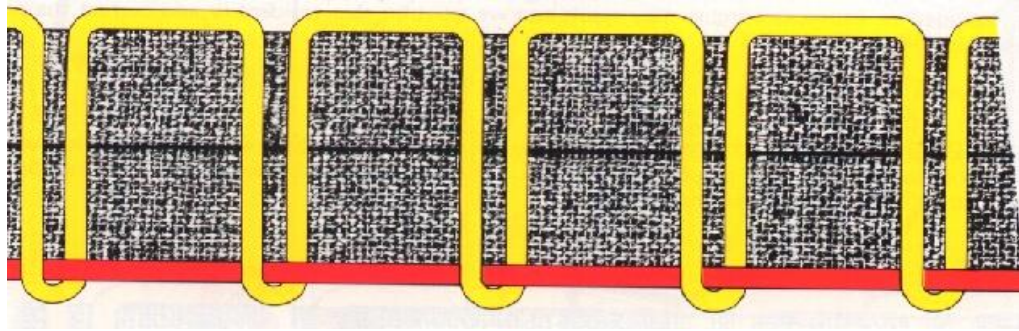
Stitch slack underneath caused by top thread tension too slack and bobbin thread tension too tight.
